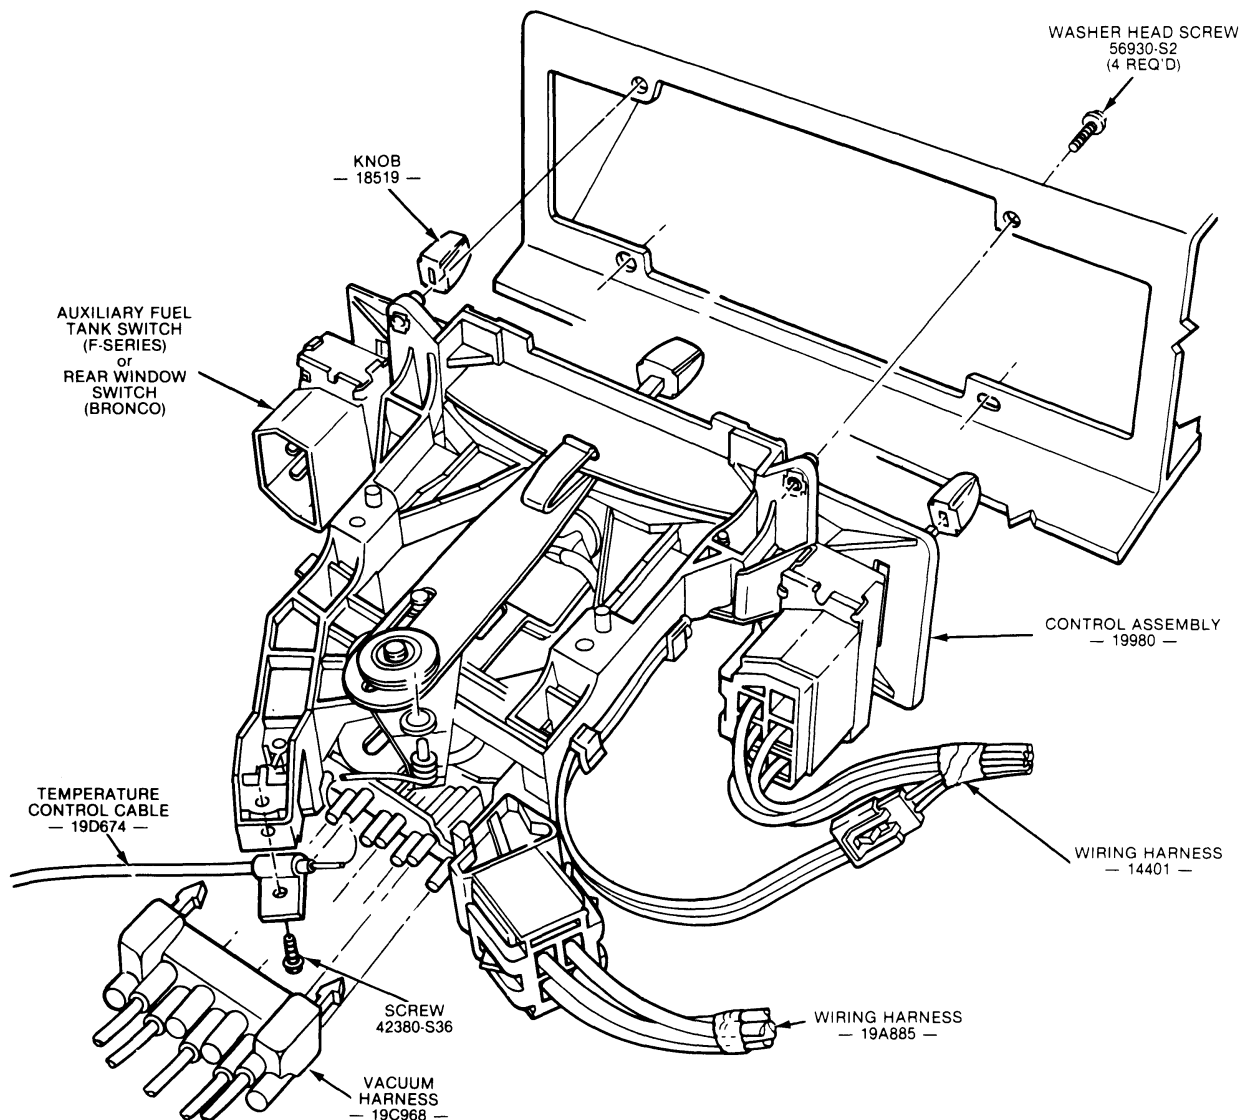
Comfort Vent Heater Control Assembly Removal
